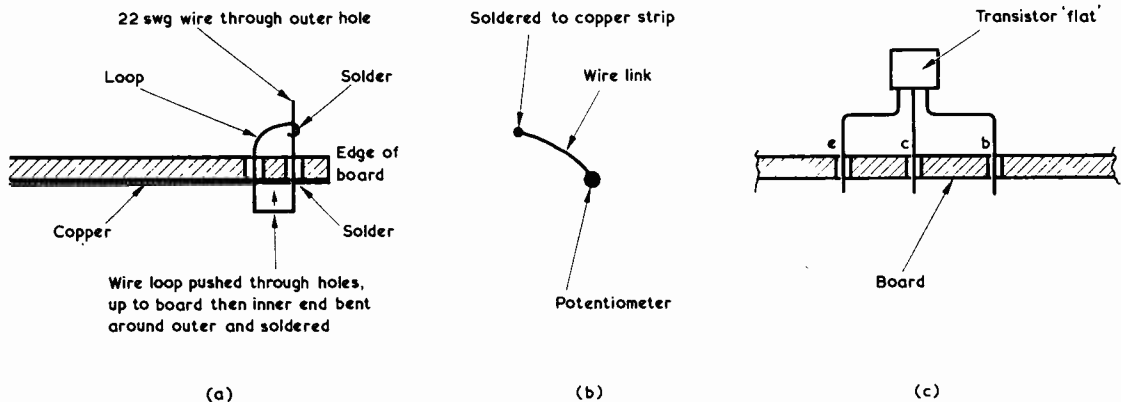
(a). Illustrating how the 'edge pins' are formed
